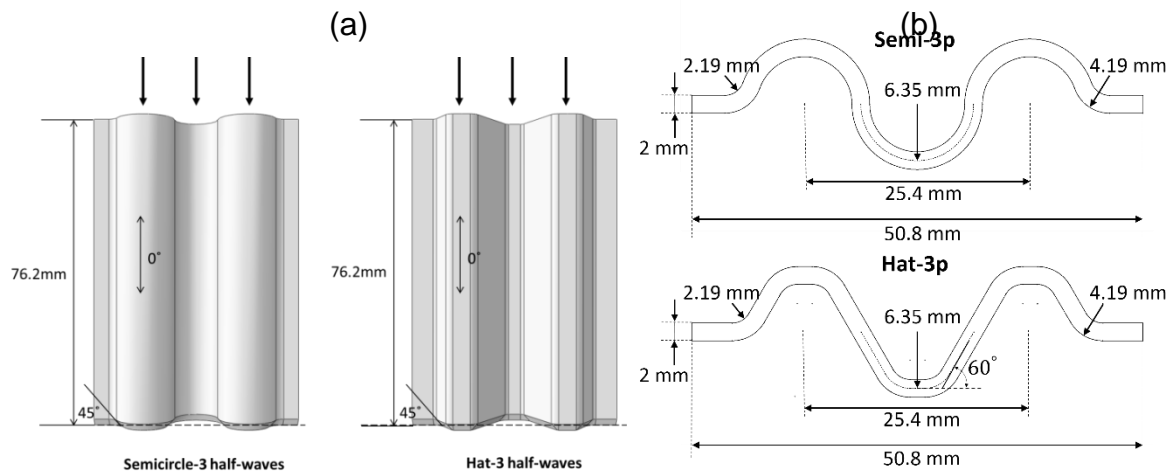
Specimen geometries produced from each manufactured panel (a) chamfer and loading direction and (b) cross-section dimensions (mm).
